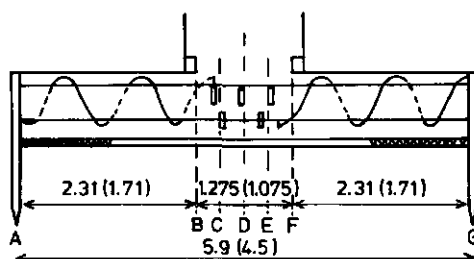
Dimensions of the header of machine B and (between brackets) machine A
